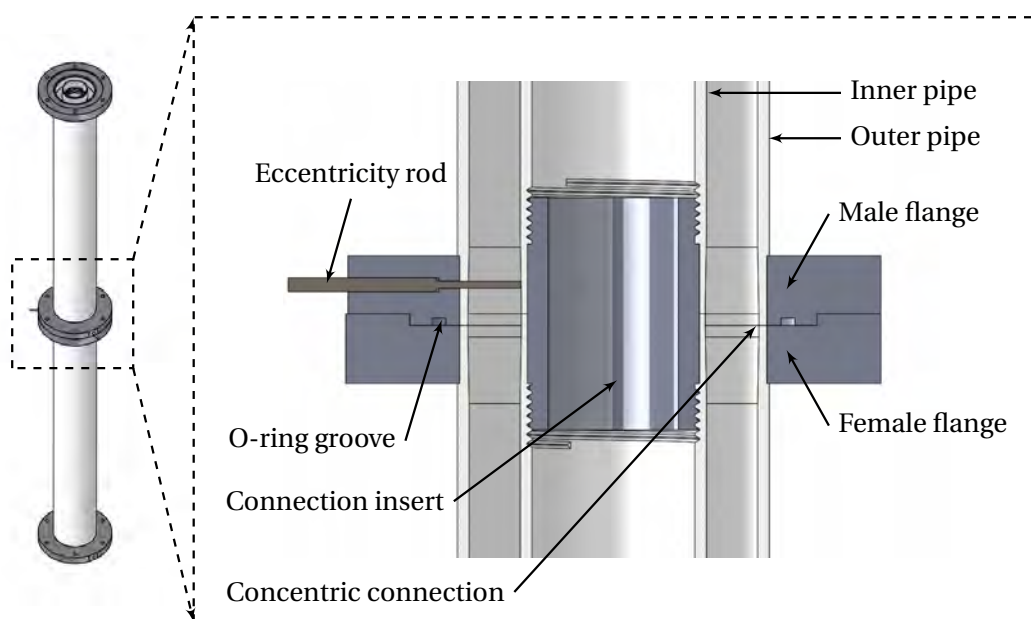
Pipe segments. Left, exploded view of two connected pipes. Right, a cross-sectional side view of the inner and outer pipe connection with the important parts. In this figure, the 80 millimeter inner pipe is displayed.
